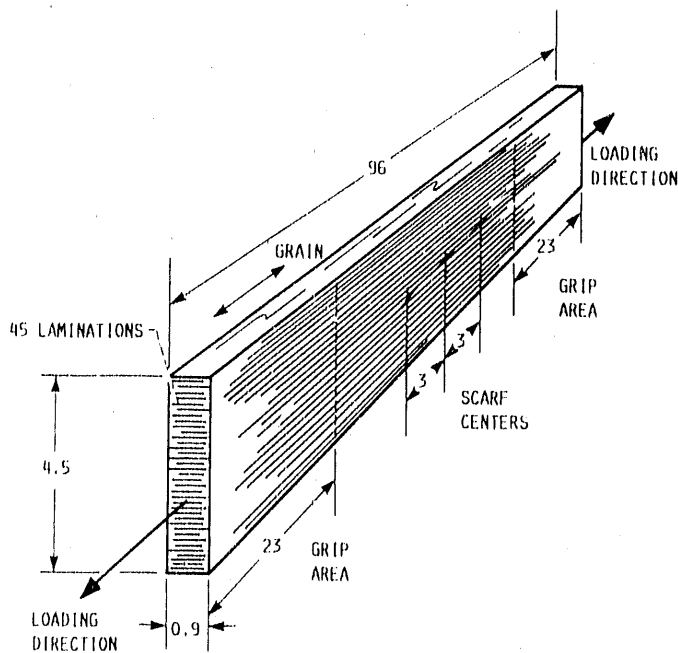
“Plank” style static tension test specimen. (Dimensions are in inches.)
